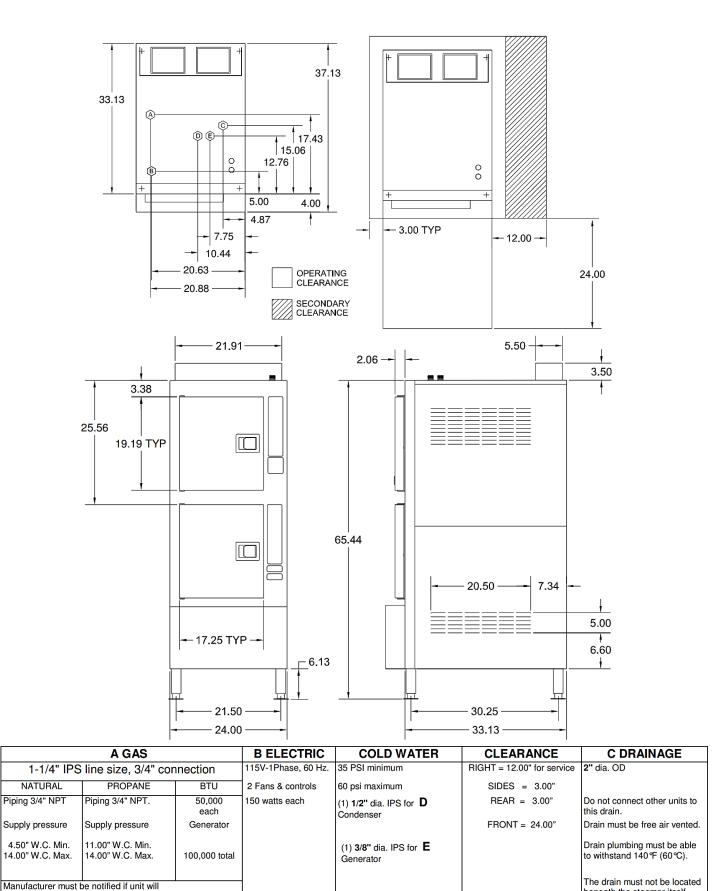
Gemini STEAMSAVER™ 24CGA10.2ES Dimensions and Clearances
